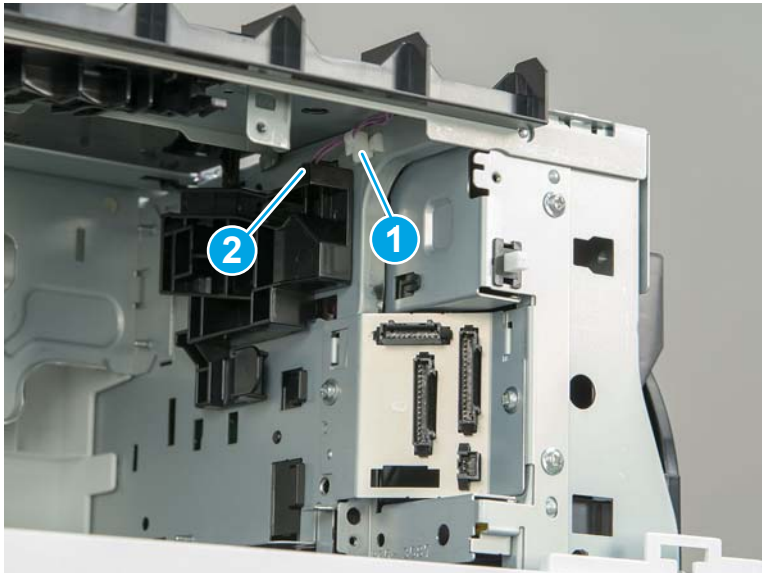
Remove the delivery assembly (M856/E85055/M776dn/M776z)
